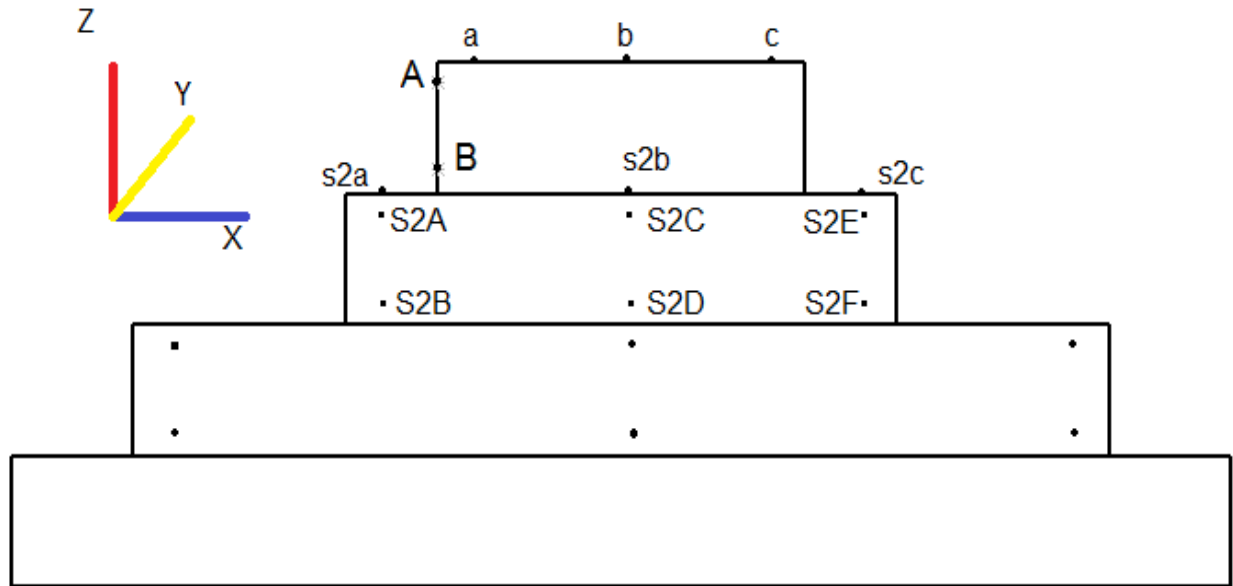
MEASUREMENT POINTS ON THE SURFACE OF WORKPIECE
